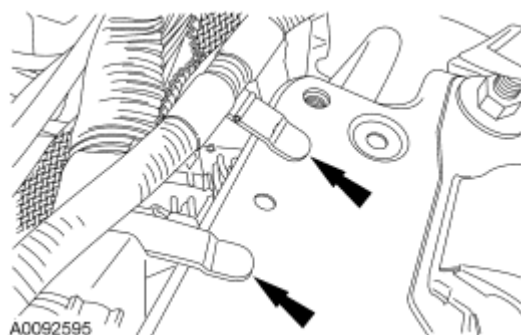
Locating Positive Battery Cable Pin-Type Retainers
